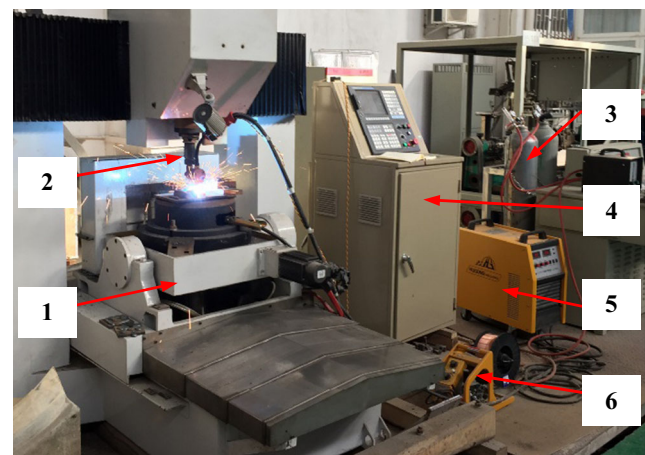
Five-axis automatic surfacing welding equipment. (1) Five-axis work flat, (2) welding torch, (3) shielding gas, (4) NC cabinet, (5) welding power supply, and (6) wire feeder
